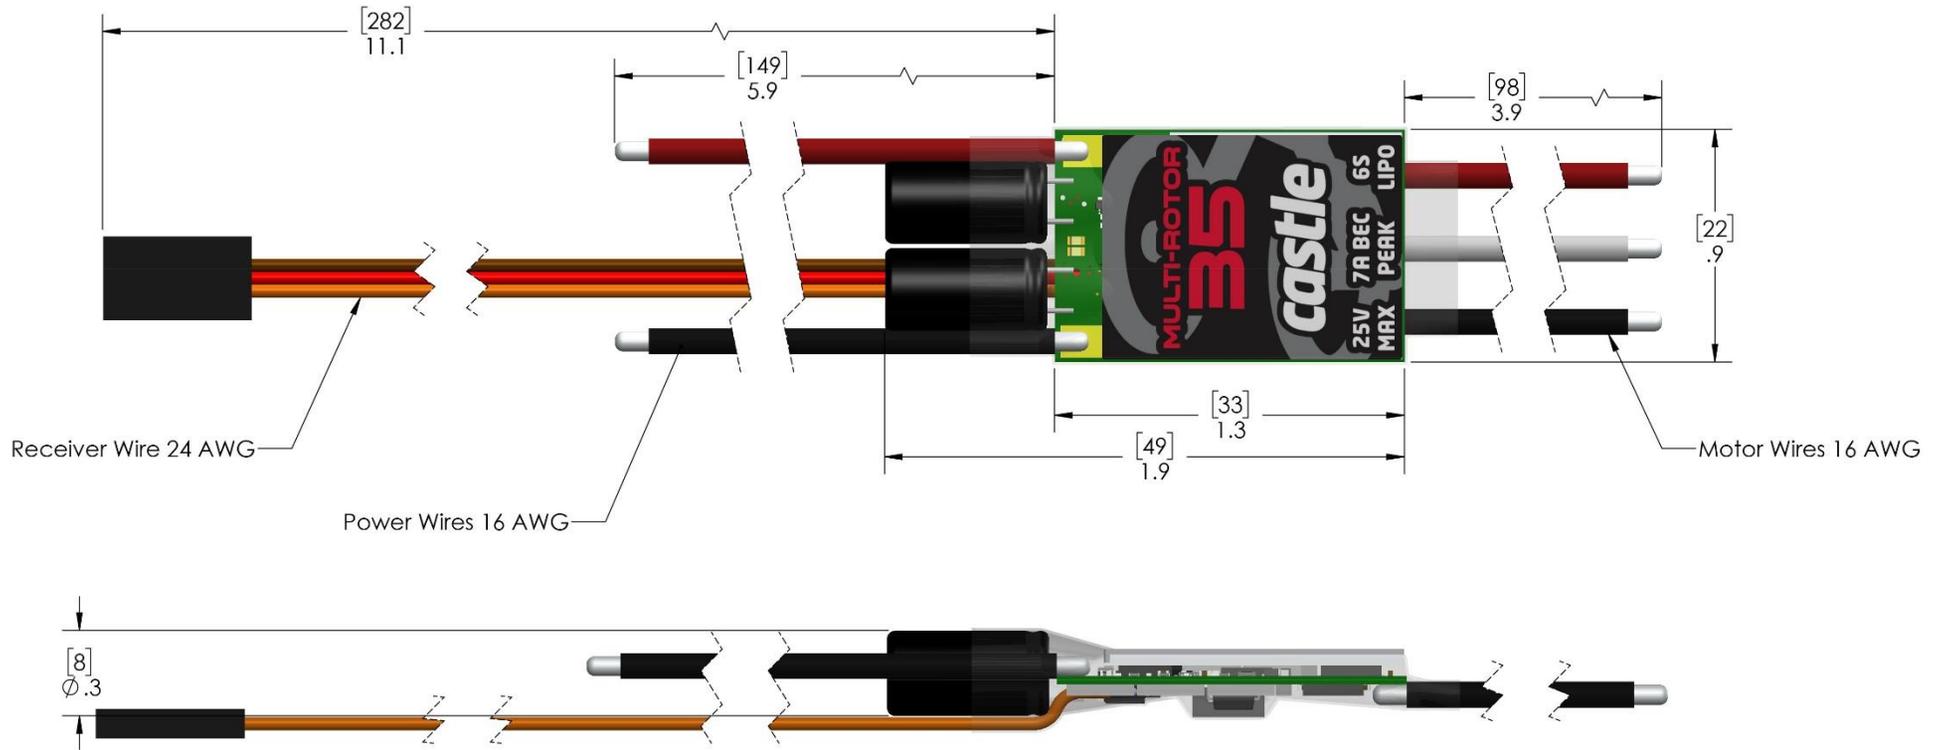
MULTI-ROTOR 35 DIMENSIONS [MILLIMETERS] INCHES
